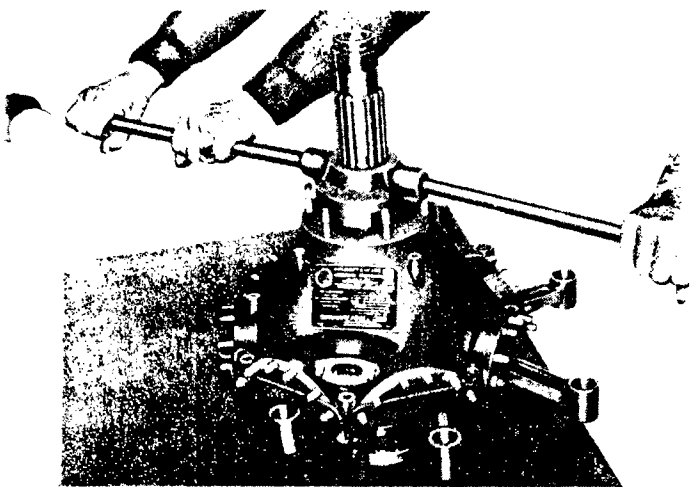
Tightening Front Crankshaft Thrust Bearing Nut
